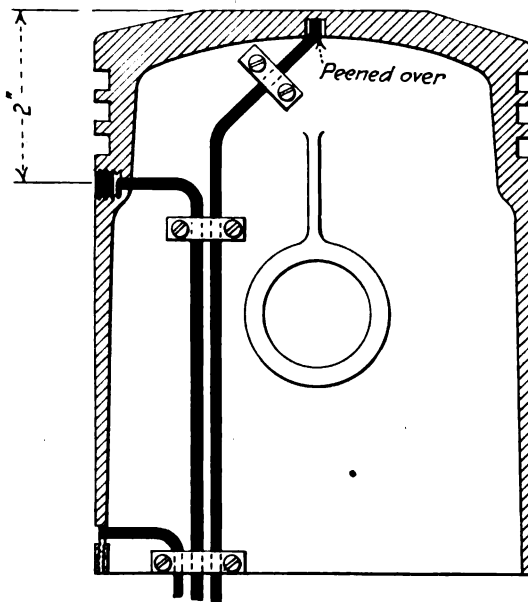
METHOD OF FASTENING THERMOCOUPLES IN PLACE IN THE PISTON
